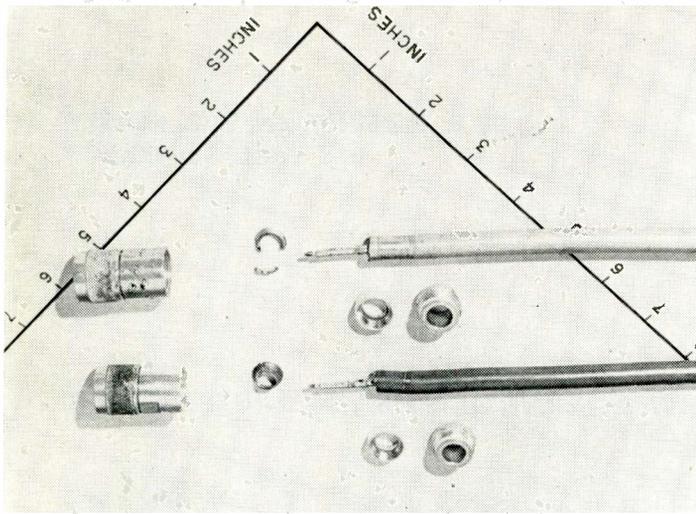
Sheath fracture of beaded cables caused by subsection to longitudinal vibration while using UG-1149 & UG-1150 connectors.
